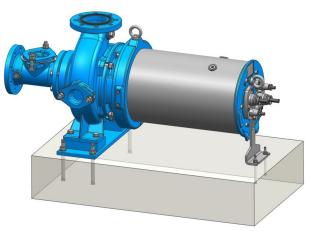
Dry installation, horizontal, up to size group 410, stationary
